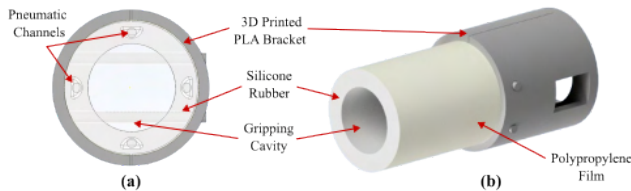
Gripper design and components illustrated with (a) cross section and (b) CAD assembly.
